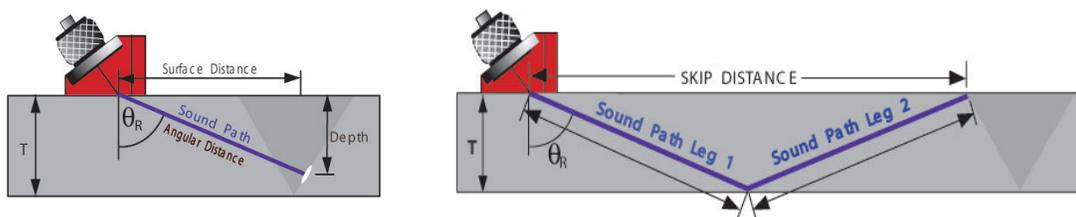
ID/OD weld defect detection using "half skip/Full skip" method
